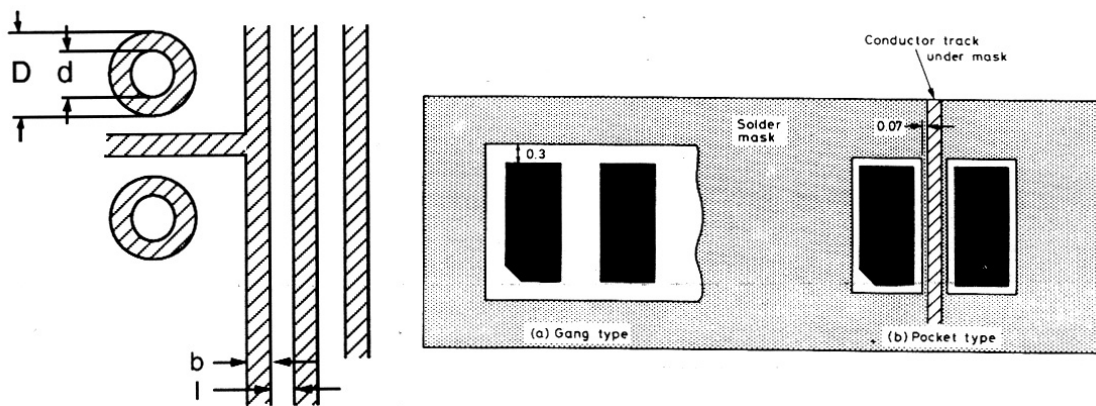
a): Parameters in layout dimensions used in Table 6.1. b): Minimum dimensions for solder mask for surface mount PWBs. Left: Dimensions for screen printed solder mask, with one common opening for all solder lands of an IC package, right: photoprocessible solder mask with a "pocket" for each terminal, permitting conductors between the solder lands [6.2].
